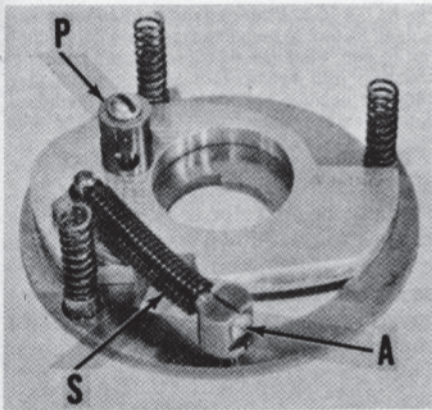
View of rotary intake valve and governor assembly. Governor plate pivots on post (P) to close off valve opening in rotary valve plate to govern engine speed. Speed at which plate closes the opening is regulated by tension of governor spring (S) which is adjusted by turning screw (A).
